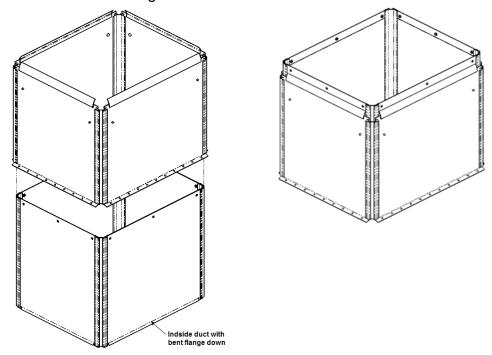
Assembling the top and bottom halves of vertical exhaust duct
